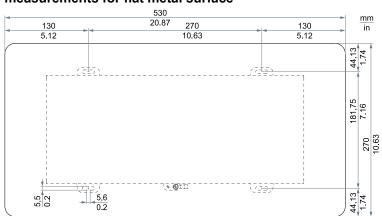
Dimension drawings: Drill hole locations and measurements for flat metal surface
